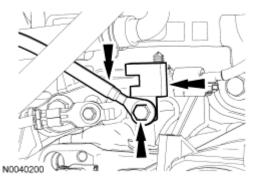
Locating Transaxle Cooler Tubes Courtesy of FORD MOTOR CO.
